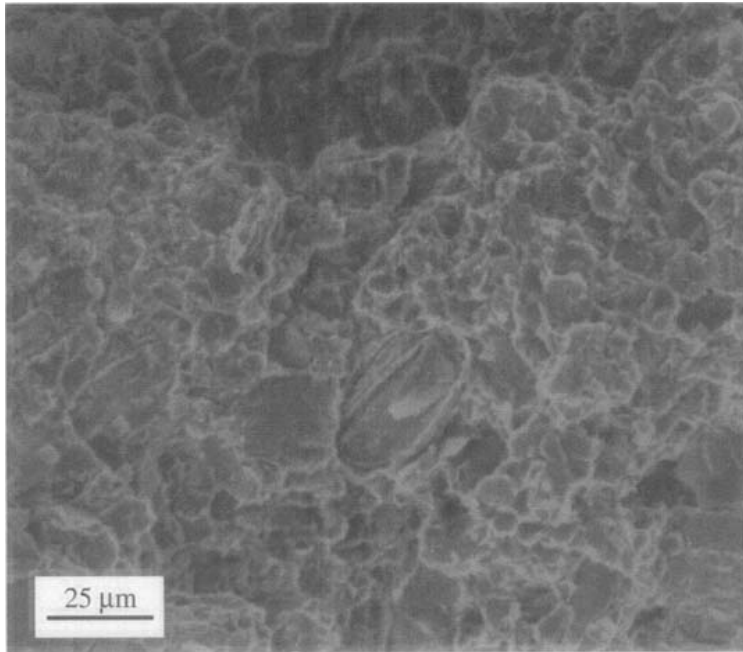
Fracture surface (SEM) of joint with adhesive B.
